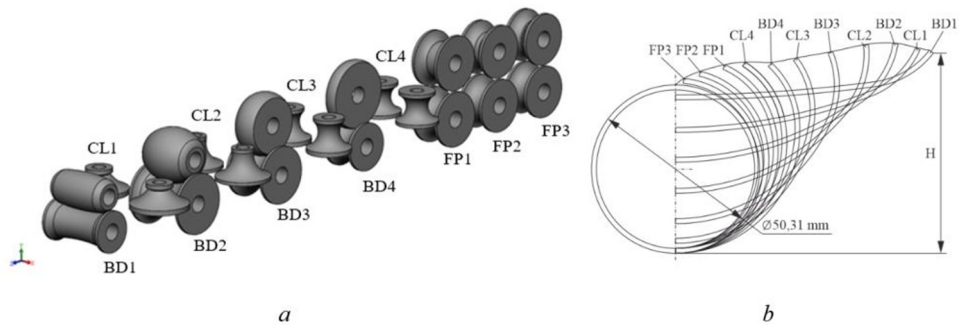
Parameters of Pipe Electrical Welding Unit TESA 10-50: *a* – mill setup; *b* – flower pattern.
